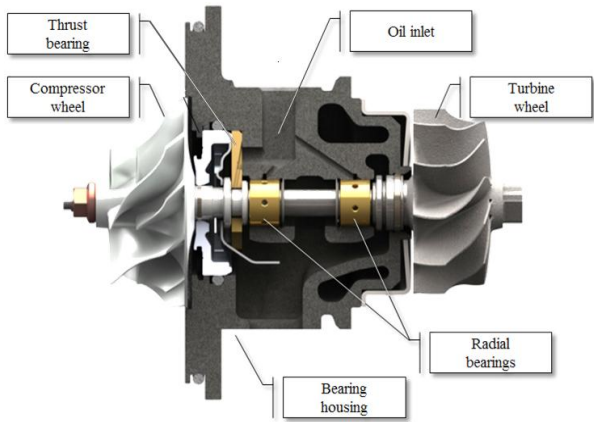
Layout of the center housing and rotating assembly of an automotive turbocharger
